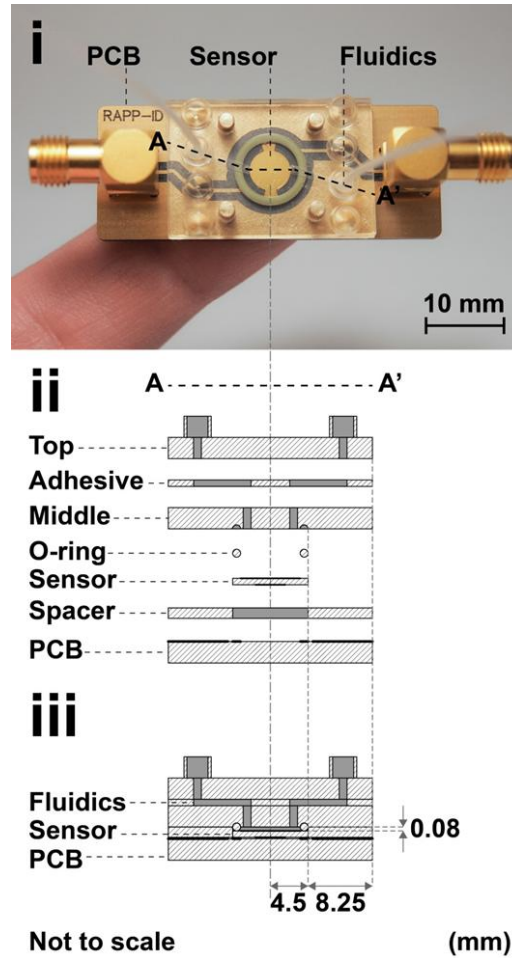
i) Top view of an assembly of a sensor between a microfluidic cartridge and a PCB. ii) An exploded cross-sectional (A-A') illustration iii) A cross-sectional illustration of a fully assembled sensor [36]
